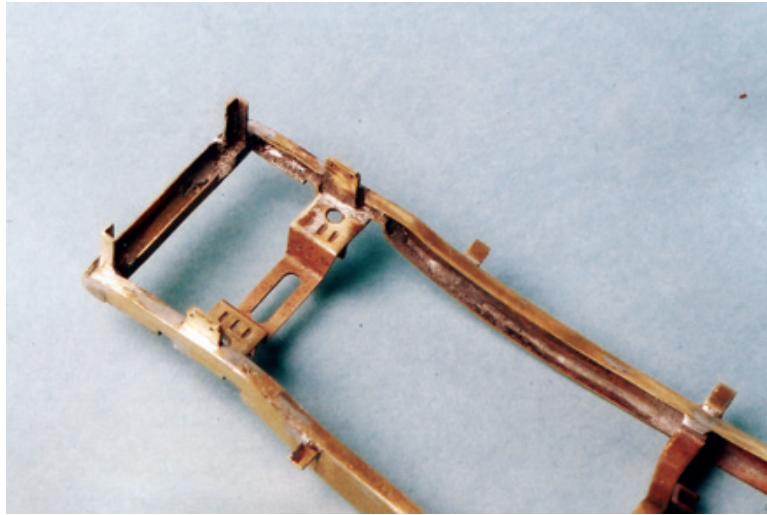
Here is the soldered brass frame (and most of the related parts) for the redesigned *Dream Truck<sup>2</sup>* project. Once assembled, the complete frame will attach to the underbody of the model with small, specially-machined 000-160 hex bolts that will go through the prototypical holes in the frame outriggers and then into the bottom of the cab. These will be capped by bolts in the floor of the cab where each bolt head fits inside a recessed “cone.” Small photo-etched “rubber” biscuits will fit over the bolts atop the frame. This bolt-mount assembly approach is both achievable and authentically realistic. The rear axle assembly is built from 12 separate parts, all silver-soldered together. The gear set attaches to the axle housing with 0000-160 bolts. The leading brackets on the rear axle trailing arm attach—with small bolts—to the brackets on the frame crossmember. At the front of the frame, the brackets to pick up the upper and lower A-arms have also been fashioned and soldered to the frame and crossmember.
